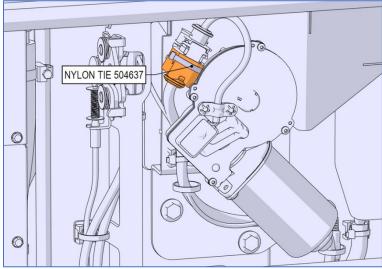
SREET SIDE DRIVE MOTOR SHOWN
